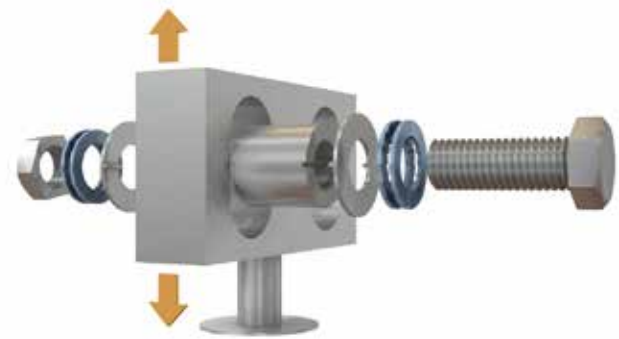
Drawing of the test rig. The assembled parts are vibrated vertically and the joints are subjected to two impacts per cycle. The impacts are parallel to the bolt. The arrow displays the direction of vibration during the test. After testing, the fasteners are inspected for rotation.
